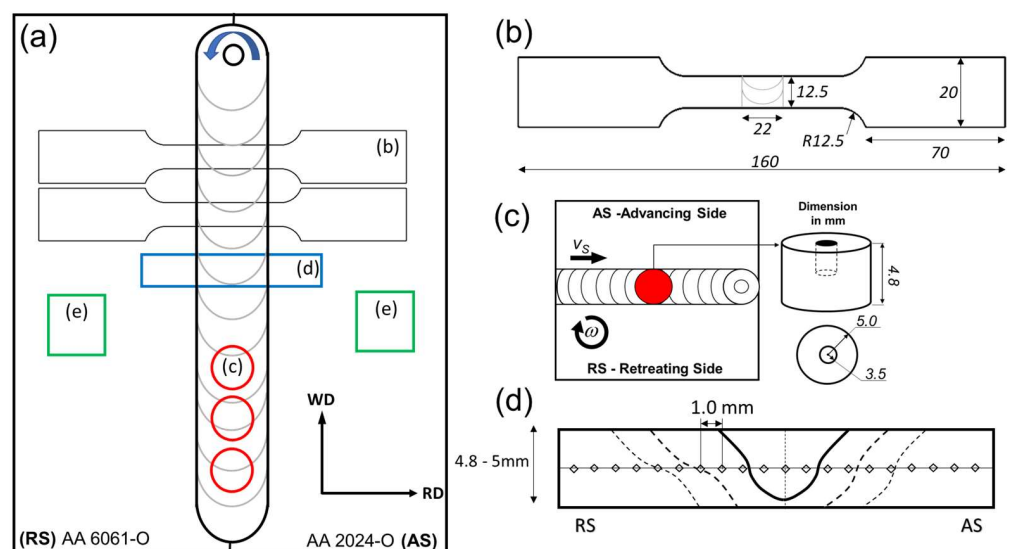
Experimental samples. (a) Location of samples in a welded joint. (b) Tensile test specimen. (c) Corrosion test specimen. (d) Microstructure and hardness sample (e) X-ray specimens.
